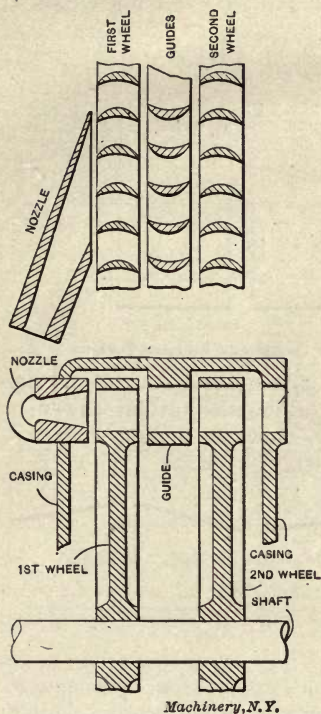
Section through Wheels and Casing of a Compound Impulse Turbine
